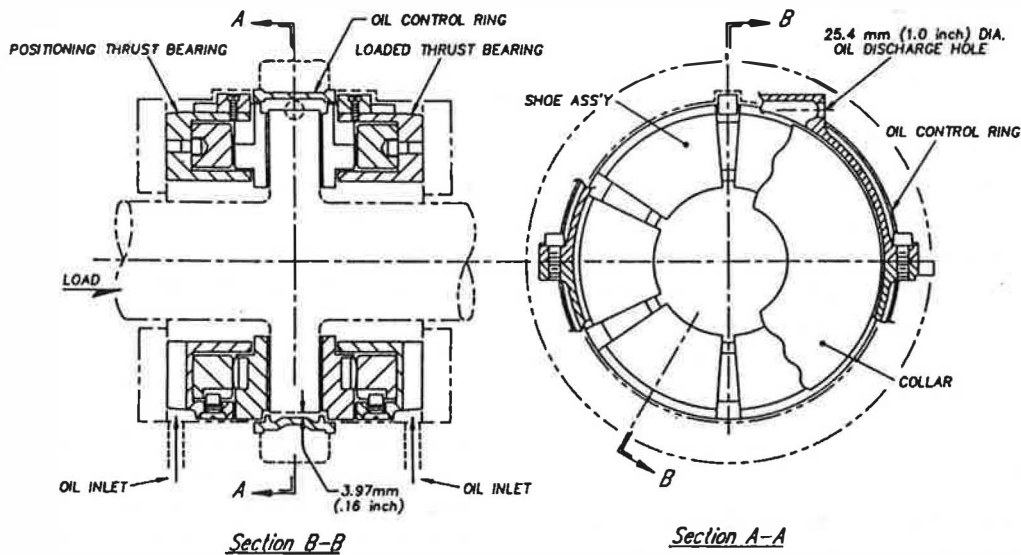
Double element thrust bearing arrangement with oil control ring configuration
